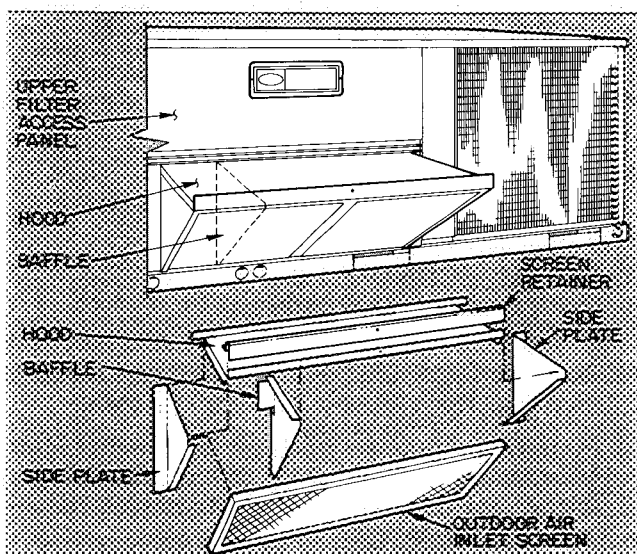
Economizer Hood Installation and Details (004,005,006,007 Units)
